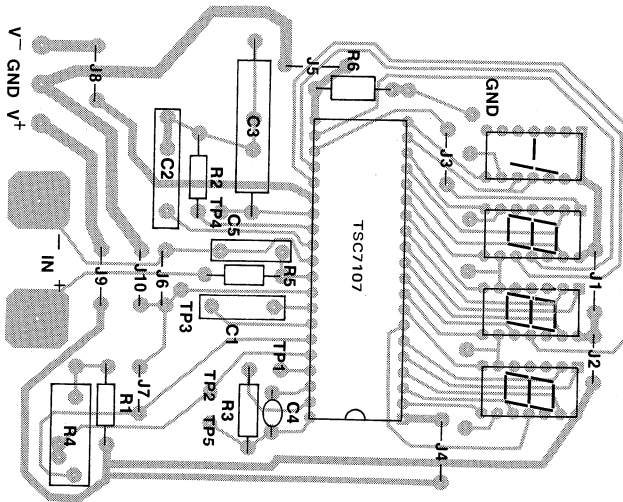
TSC7106 – Circuit Board Layout and Component Placement
